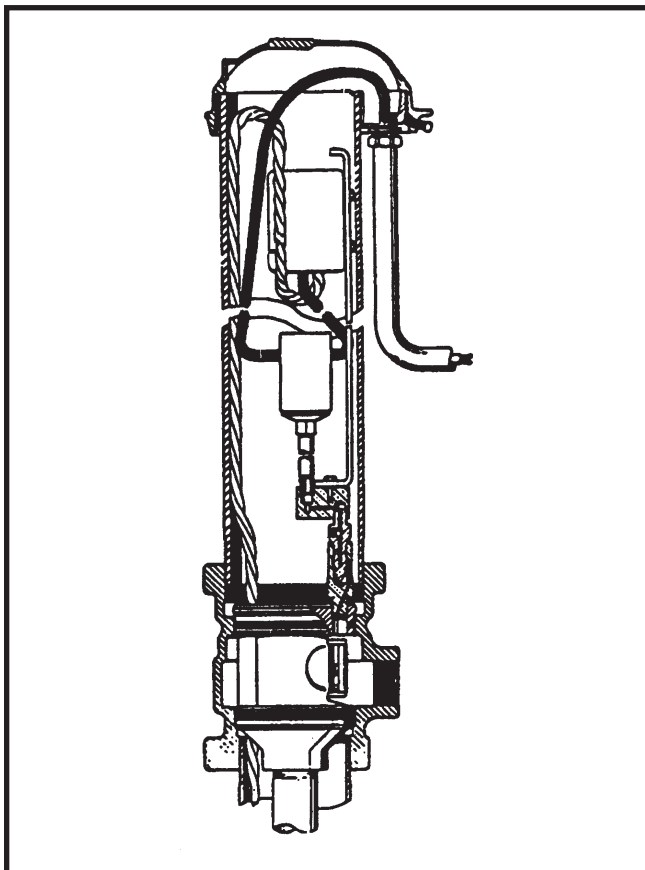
MONITOR PS UNIT CUTAWAY TO SHOW OAWSPLF CONTROL KIT INSTALLED IN OPERATING POSITION.
